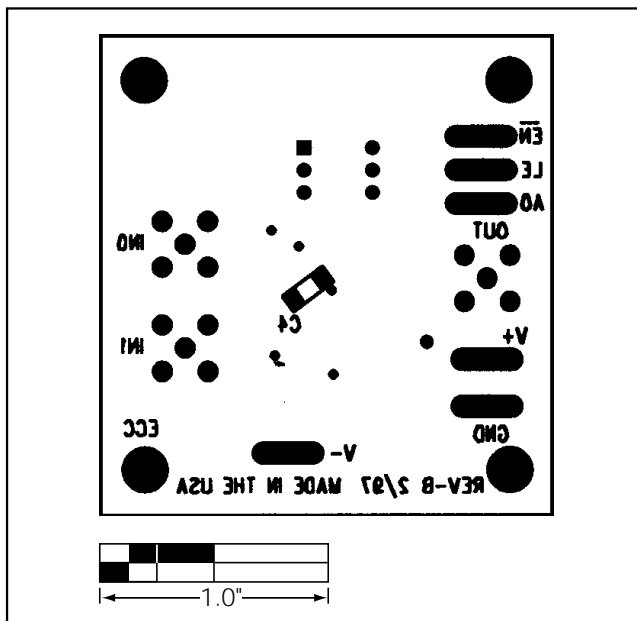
MAX4159 EV Kit Component Placement Guide—Solder Side
